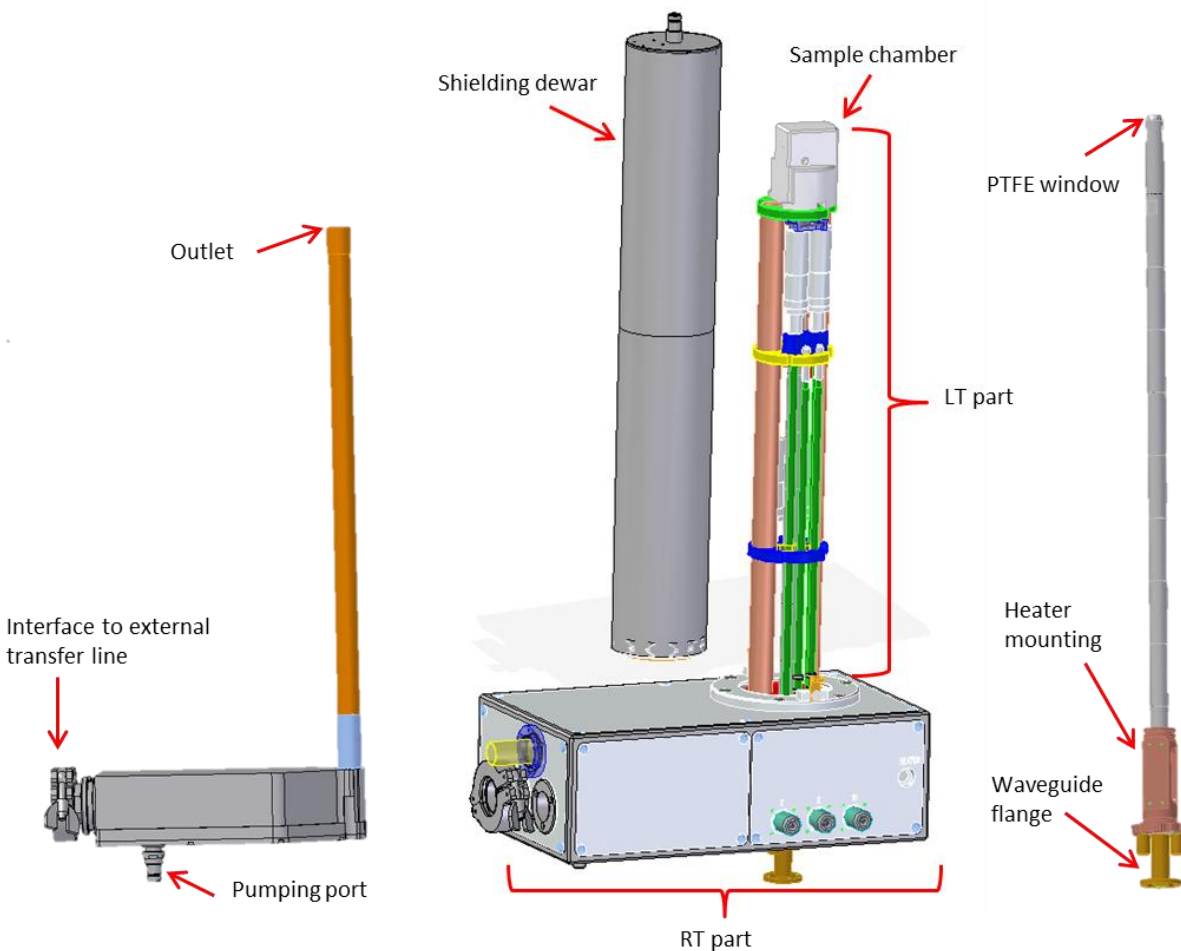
Left side: gas transfer line with ports; Center: complete probe with shielding Dewar; right side: waveguide (Graphics: Solid Edge ST6)
